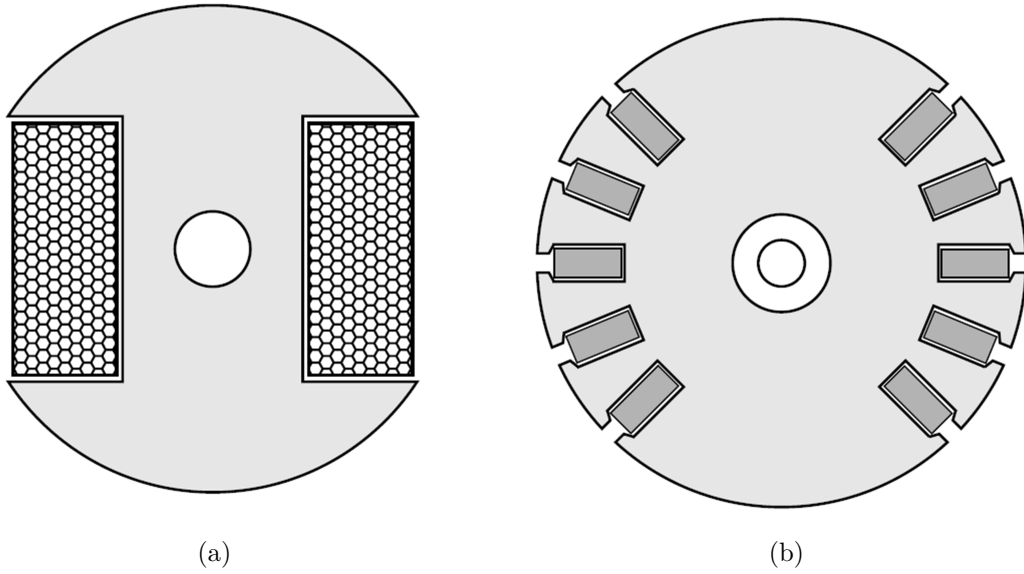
Rotor construction of a separately excited synchronous machine: (a) Salient pole rotor; (b) Cylindrical rotor (Hughes, 2006).
